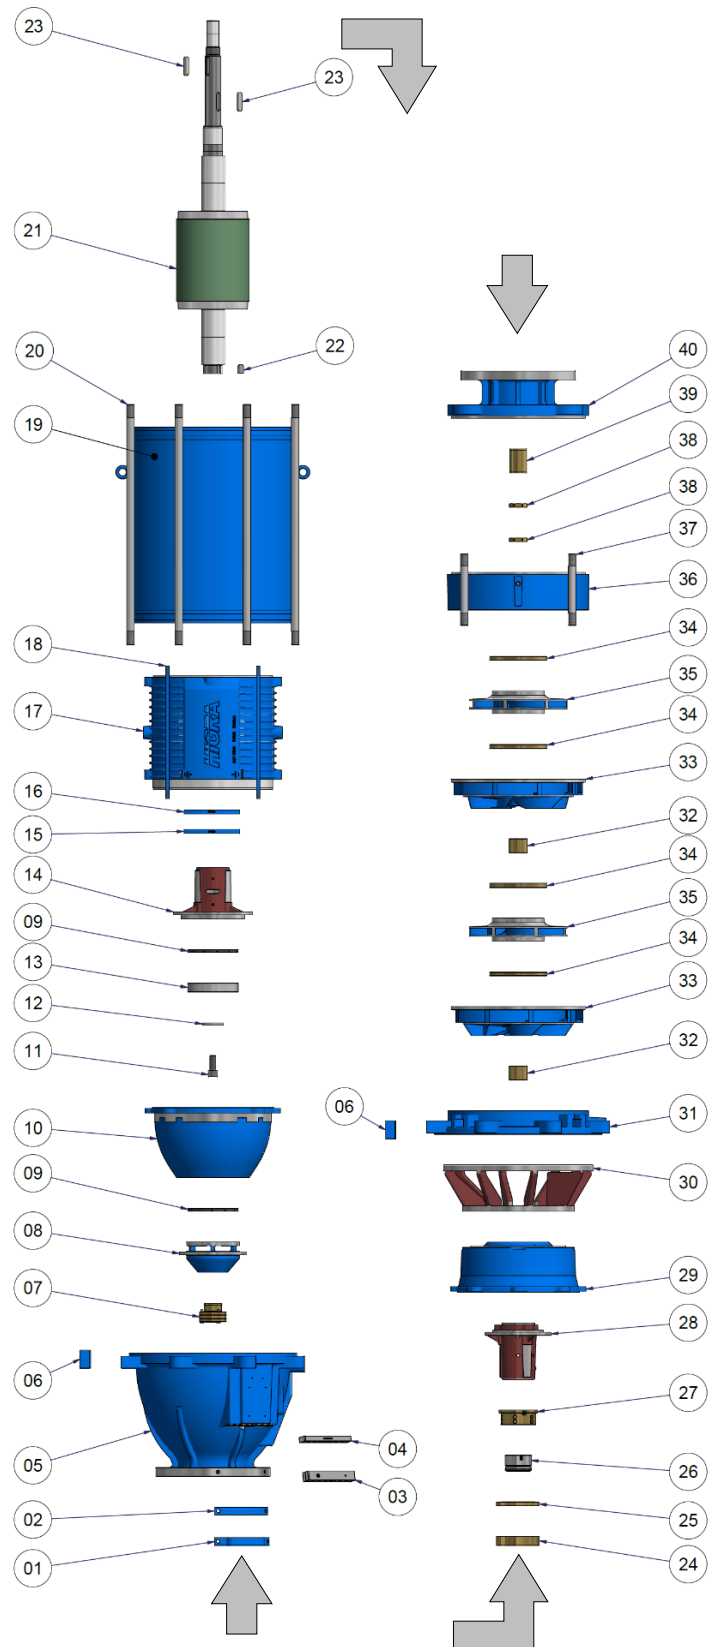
Detailed Drawing of an Amphibious Pump Model R2-320/125B
